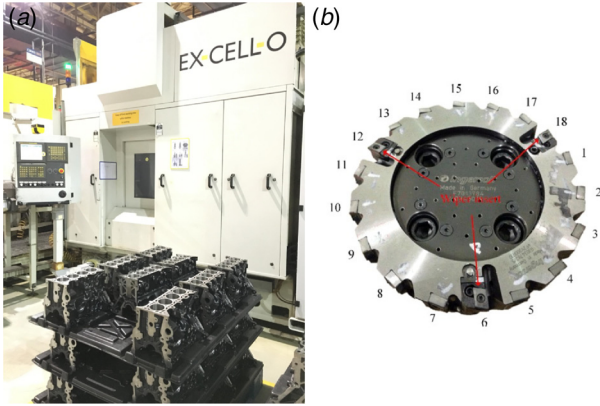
(a) EX-CELL-O machining center and (b) the face milling cutter
